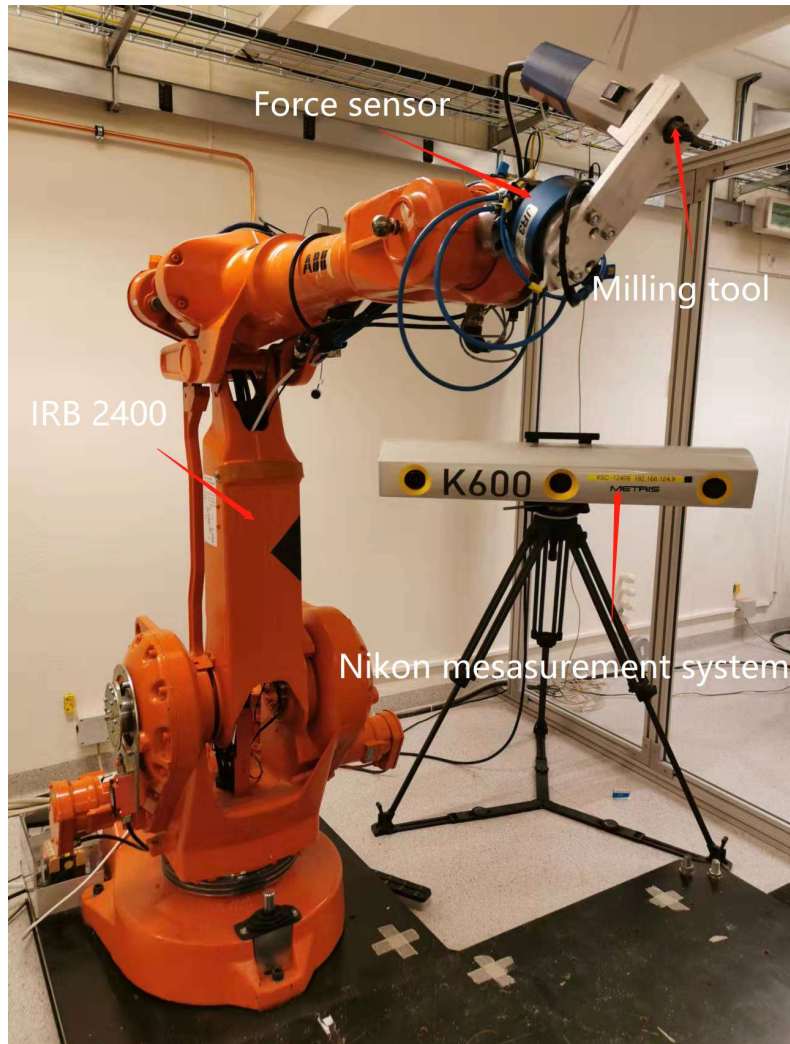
Experiment setup: IRB 2400, force sensor, milling tool, Nikon measurement system
